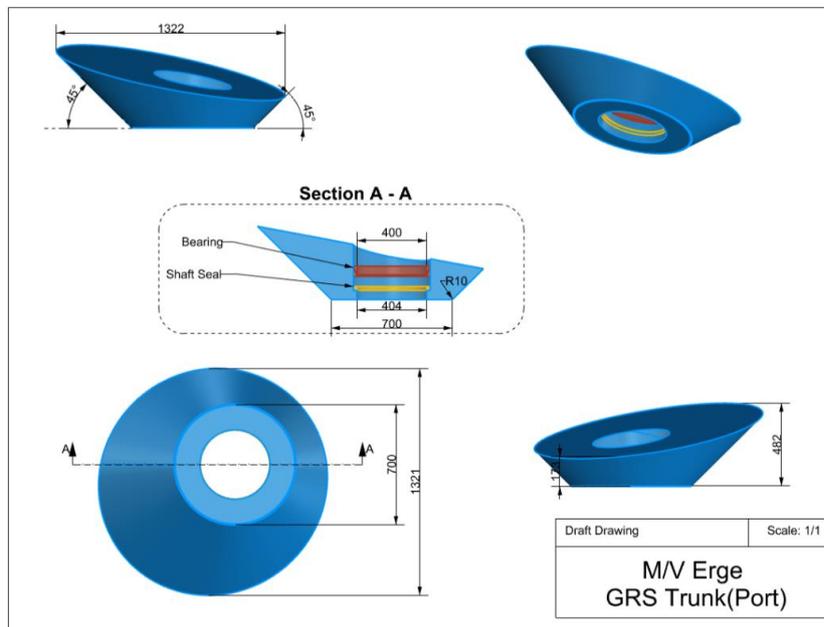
GRS Shaft trunk draft mechanic drawing
